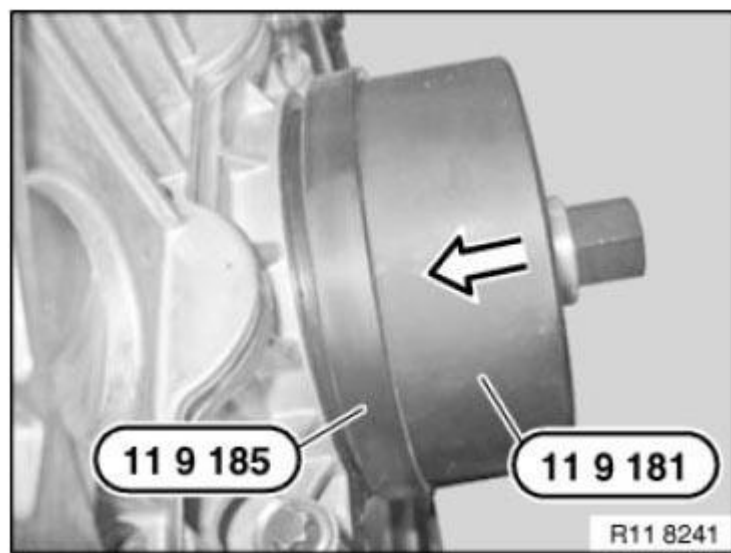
Pulling Radial Shaft Seal Using Special Tool 11 9 181/11 9 185/11 9 183
